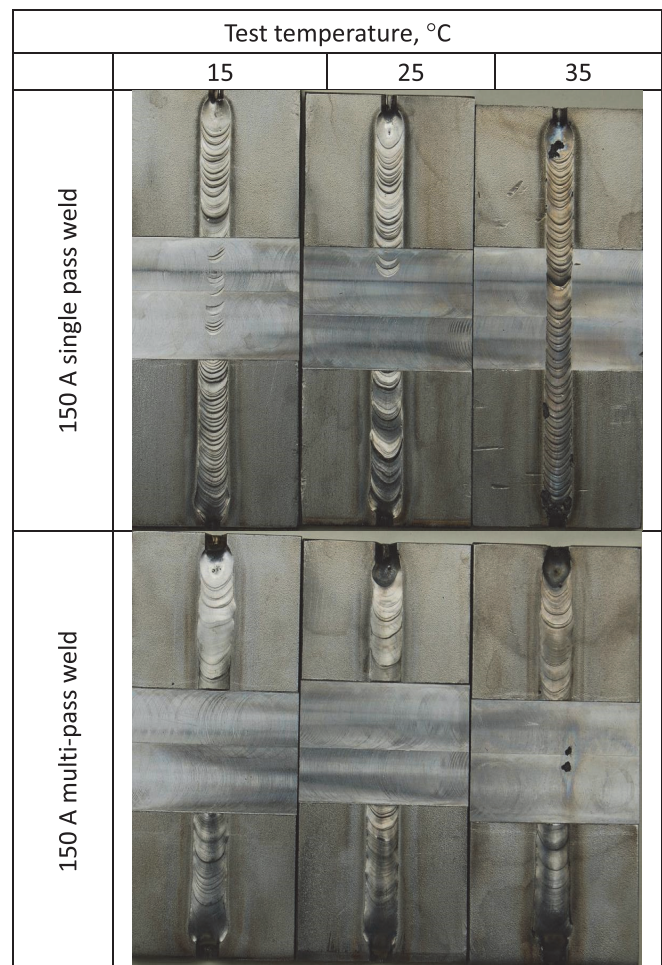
The TIG welded joint of stainless steel S82441 made at 100% Ar shielding with filler metal after corrosion test ASTM G48 at temperatures 15, 25 and 35°C
